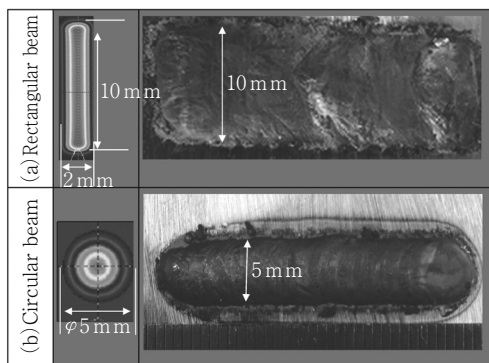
Cladding layer (a) Rectangular beam (b) Circular beam
